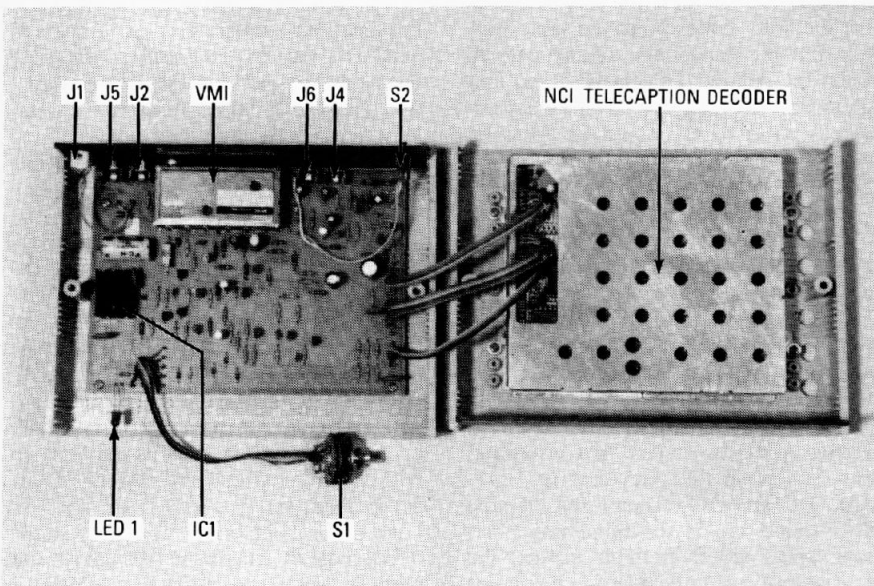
THE PC BOARD MOUNTS IN THE BOTTOM of the case and the NCI decoder module mounts in the top. Make sure that the three jumper cables connecting the PC board and the module are oriented correctly.
